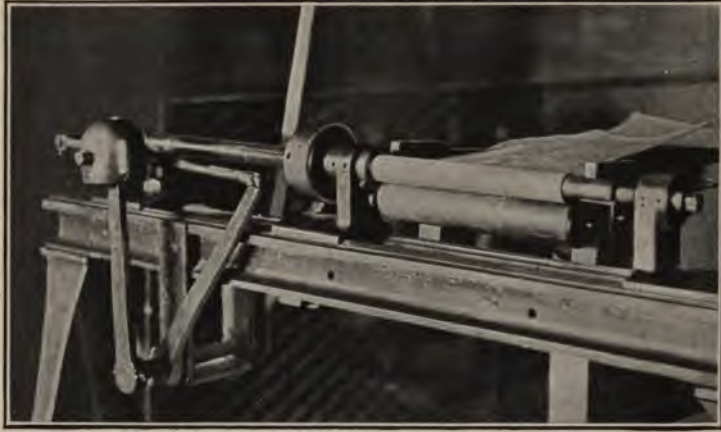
Case-rolling machine; paper rolled on mandrel.
